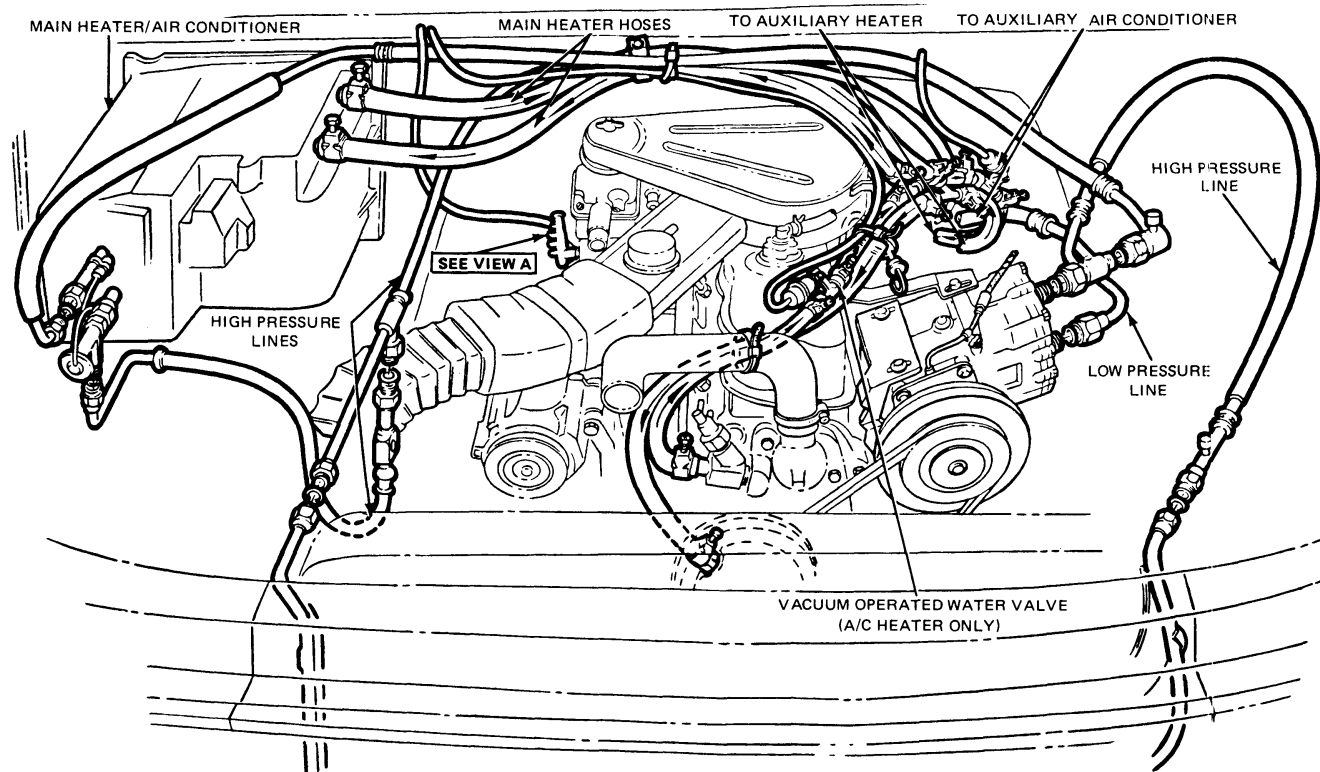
Auxiliary Air Conditioner Hose Routing—7.5L (460 CID) V-8 Engine
